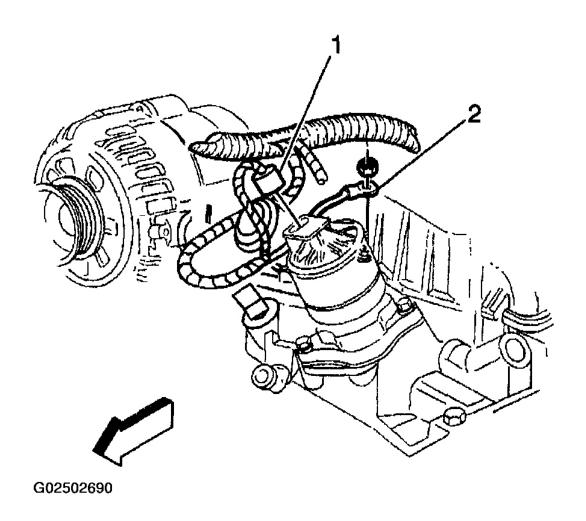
Connecting EGR Valve Electrical Connector & Installing Ground Wire At Water Outlet
